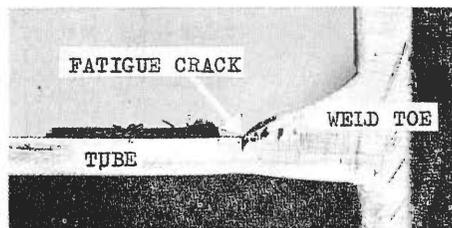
Cracking in the Transverse Section of the Weld Toe; Specimen A-4, the 400 th cycle, Crack 10mm long, 0.15mm wide, 0.5mm deep in the tube surface
